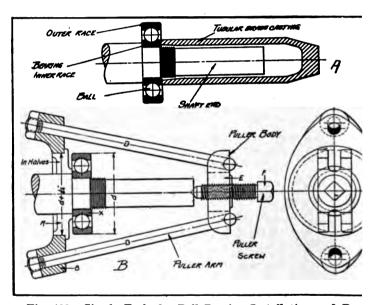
Simple Tools for Ball Bearing Installation and Ben
